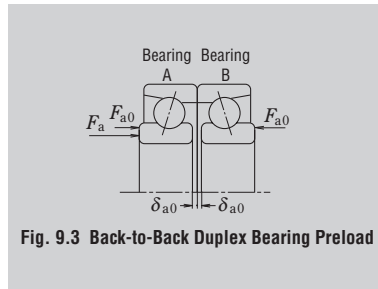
Back-to-Back Duplex Bearing Preload
